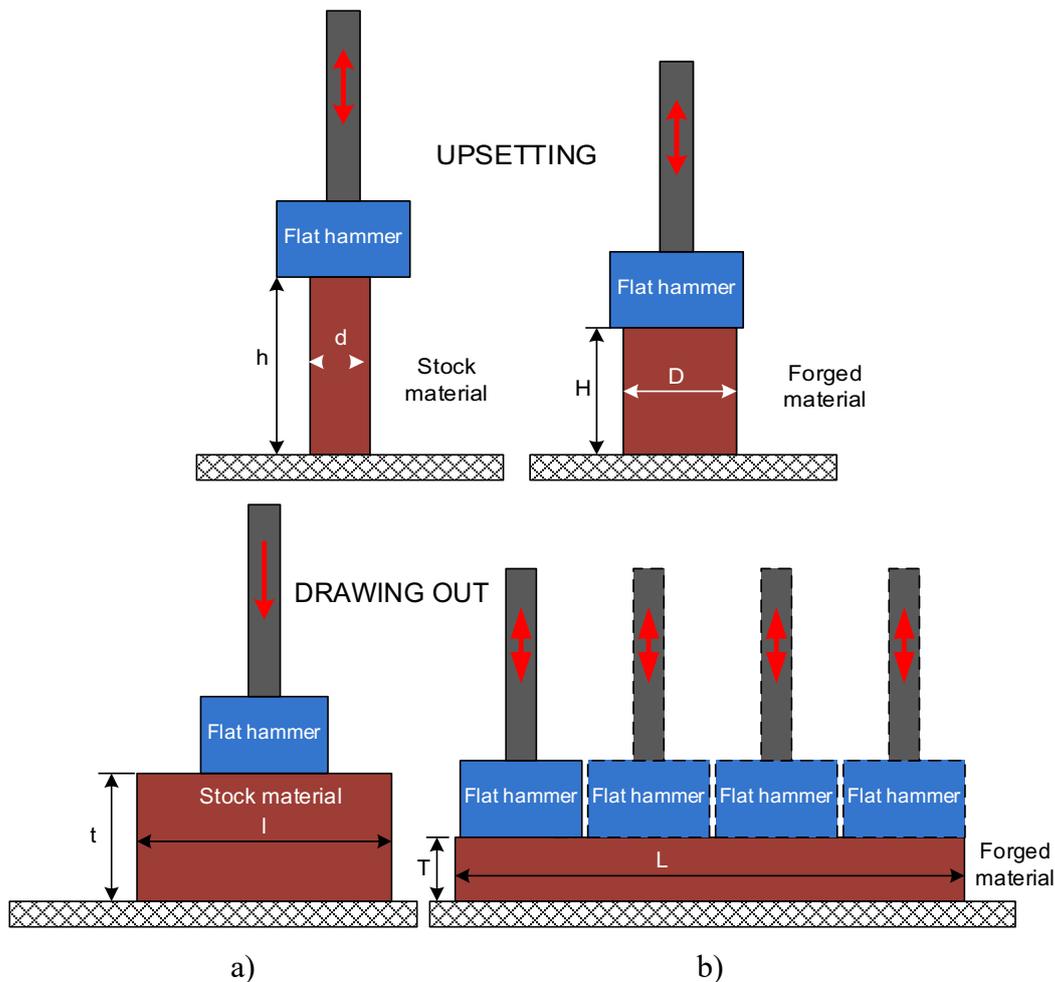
Schematic showing a) upsetting and b) drawing out plastic deformation approaches for forming
